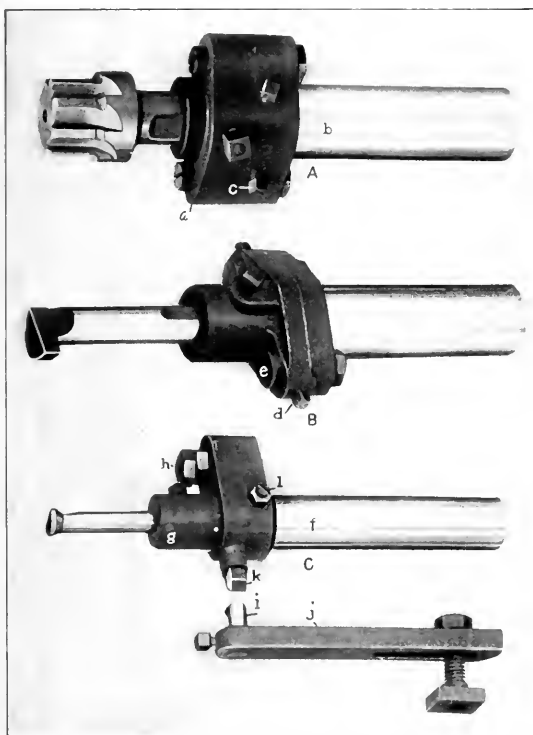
Standard Adjustable Counterbore Boring and Recessing Tool-holders
